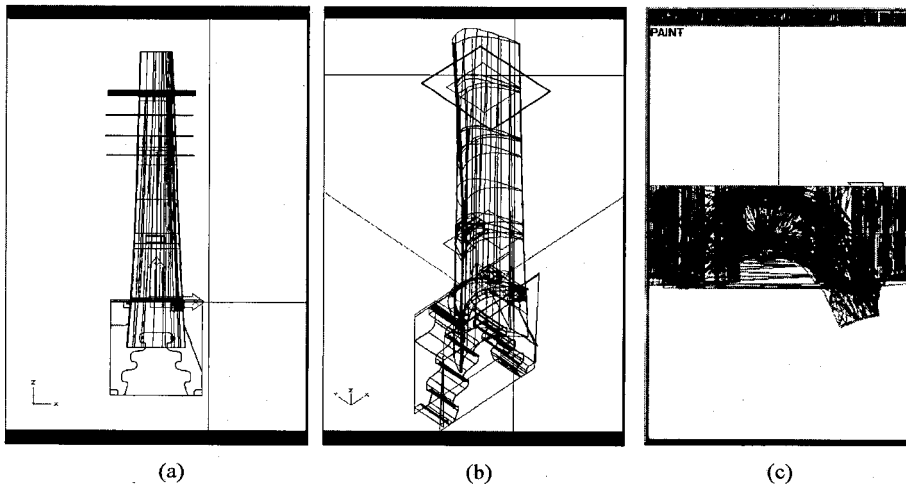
Example of a blade profile-intersection of blade surface and section plane. (a) side view (b) isometric view (c) top view
